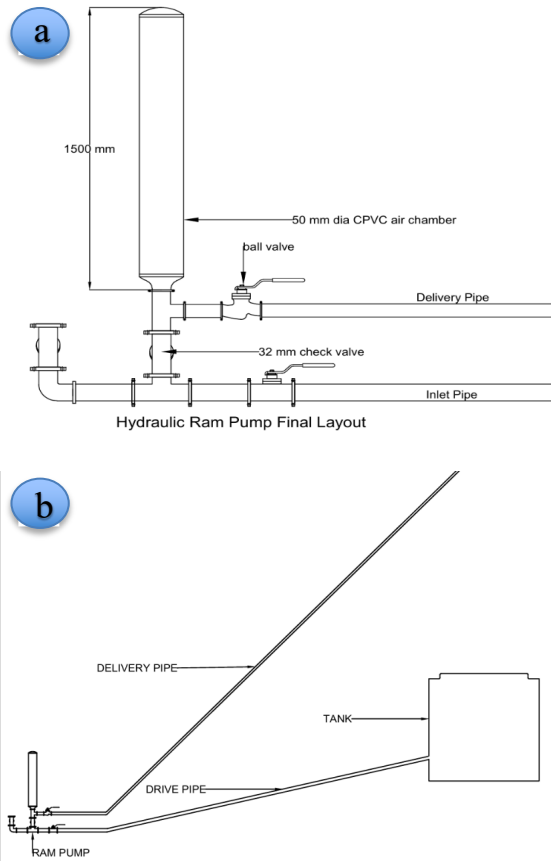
AutoCAD drawings of the prototype: (a) hydraulic ram pump layout showing component dimensions and assembly sequence; (b) schematic representation of the ram pump set-up, including the supply tank, drive pipe and delivery line
